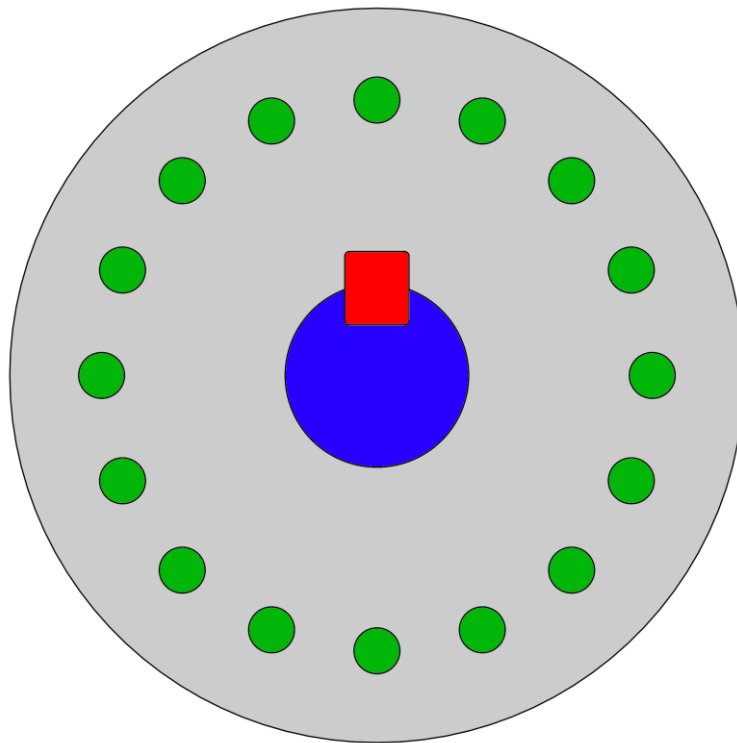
cross section of the steel wheel simulating a disc shaped rotor (green – balance weights installation locations, blue – shaft, red – specially shaped fitting)
